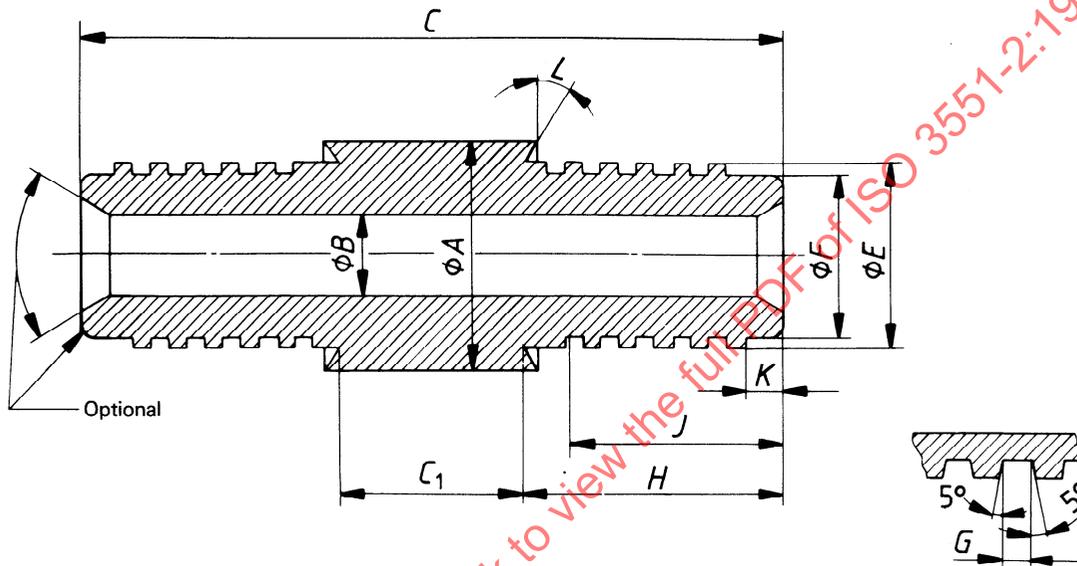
"W" design drill rod — Drill rod tube (see table 7)
